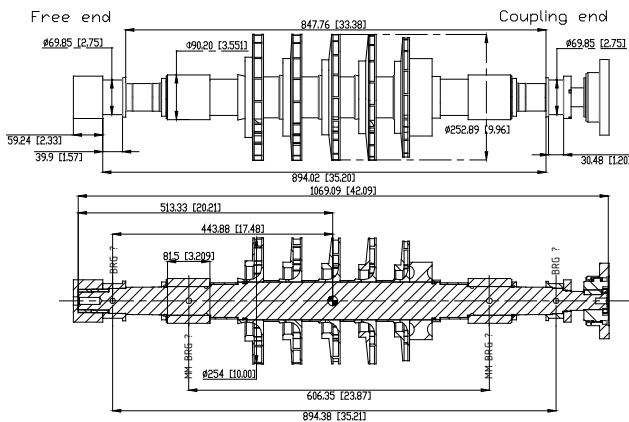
Test rotor configuration (dimensions in mm [in.]).
